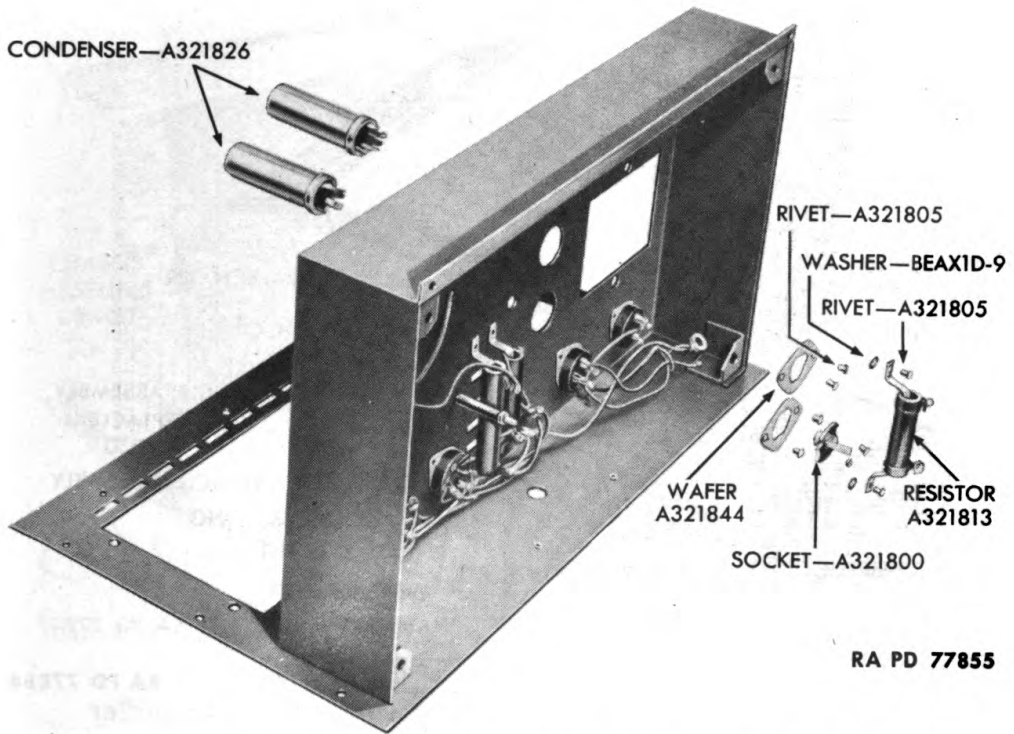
Removal of Condensers and Associated Parts From Amplifier
